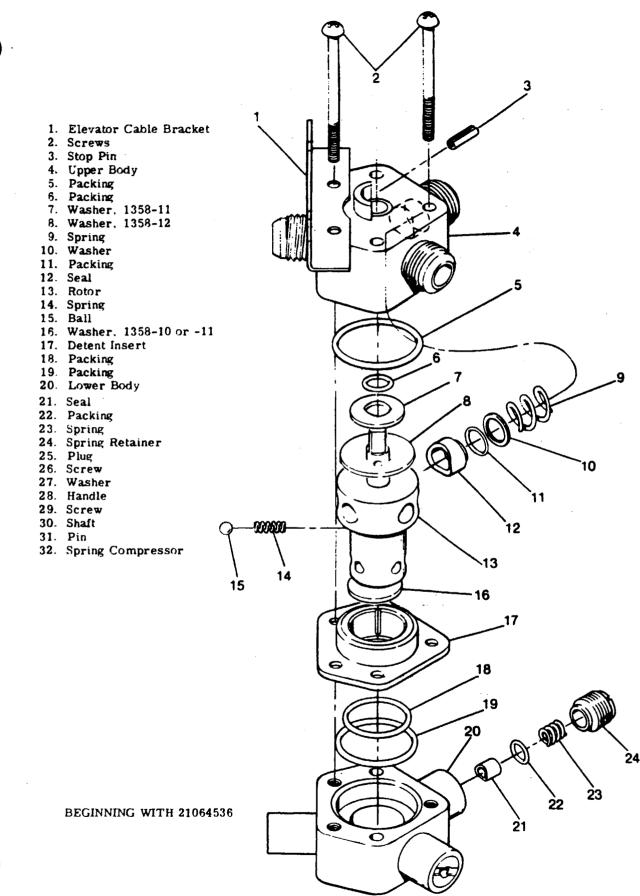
Fuel Selector Valve. (Sheet 1 of 2).
